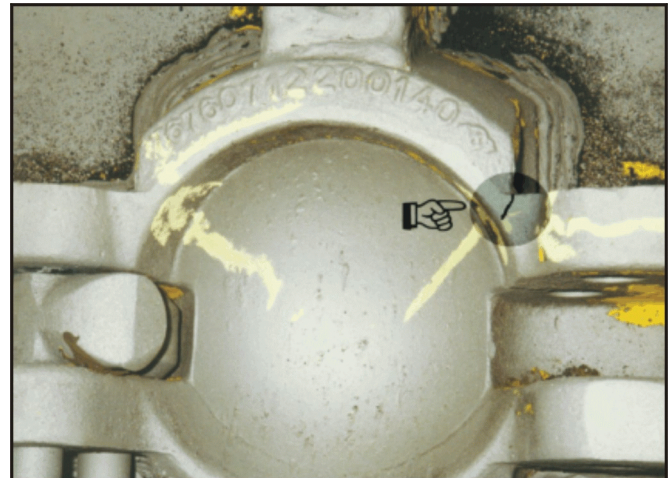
Failure due to stress riser created by sharp corner in canopy leg socket casting.
